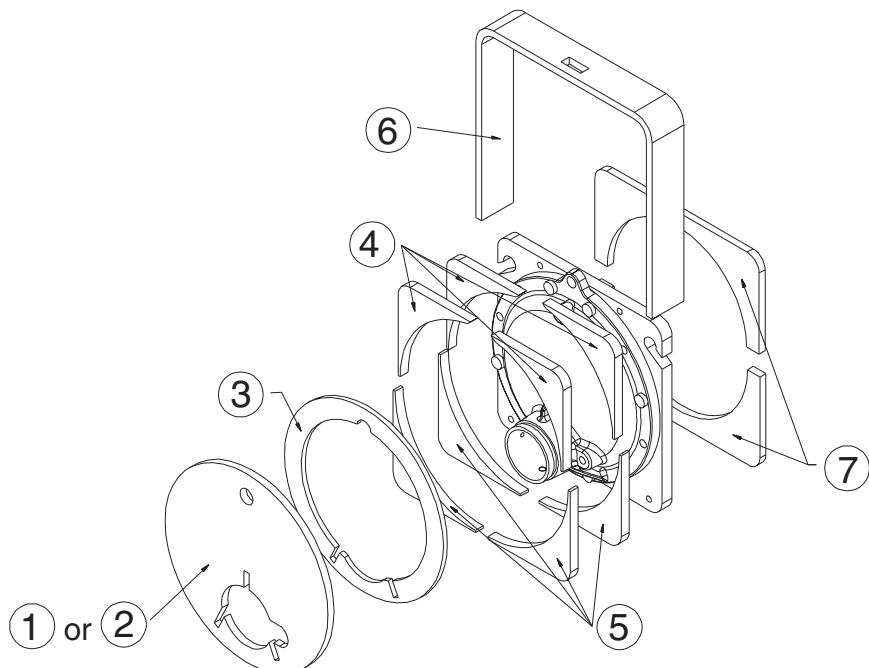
Head and End Tubesheet Insulation for Tables 2-5
